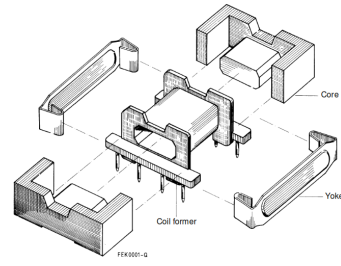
Core forming pieces provided by the core's manufacturer
